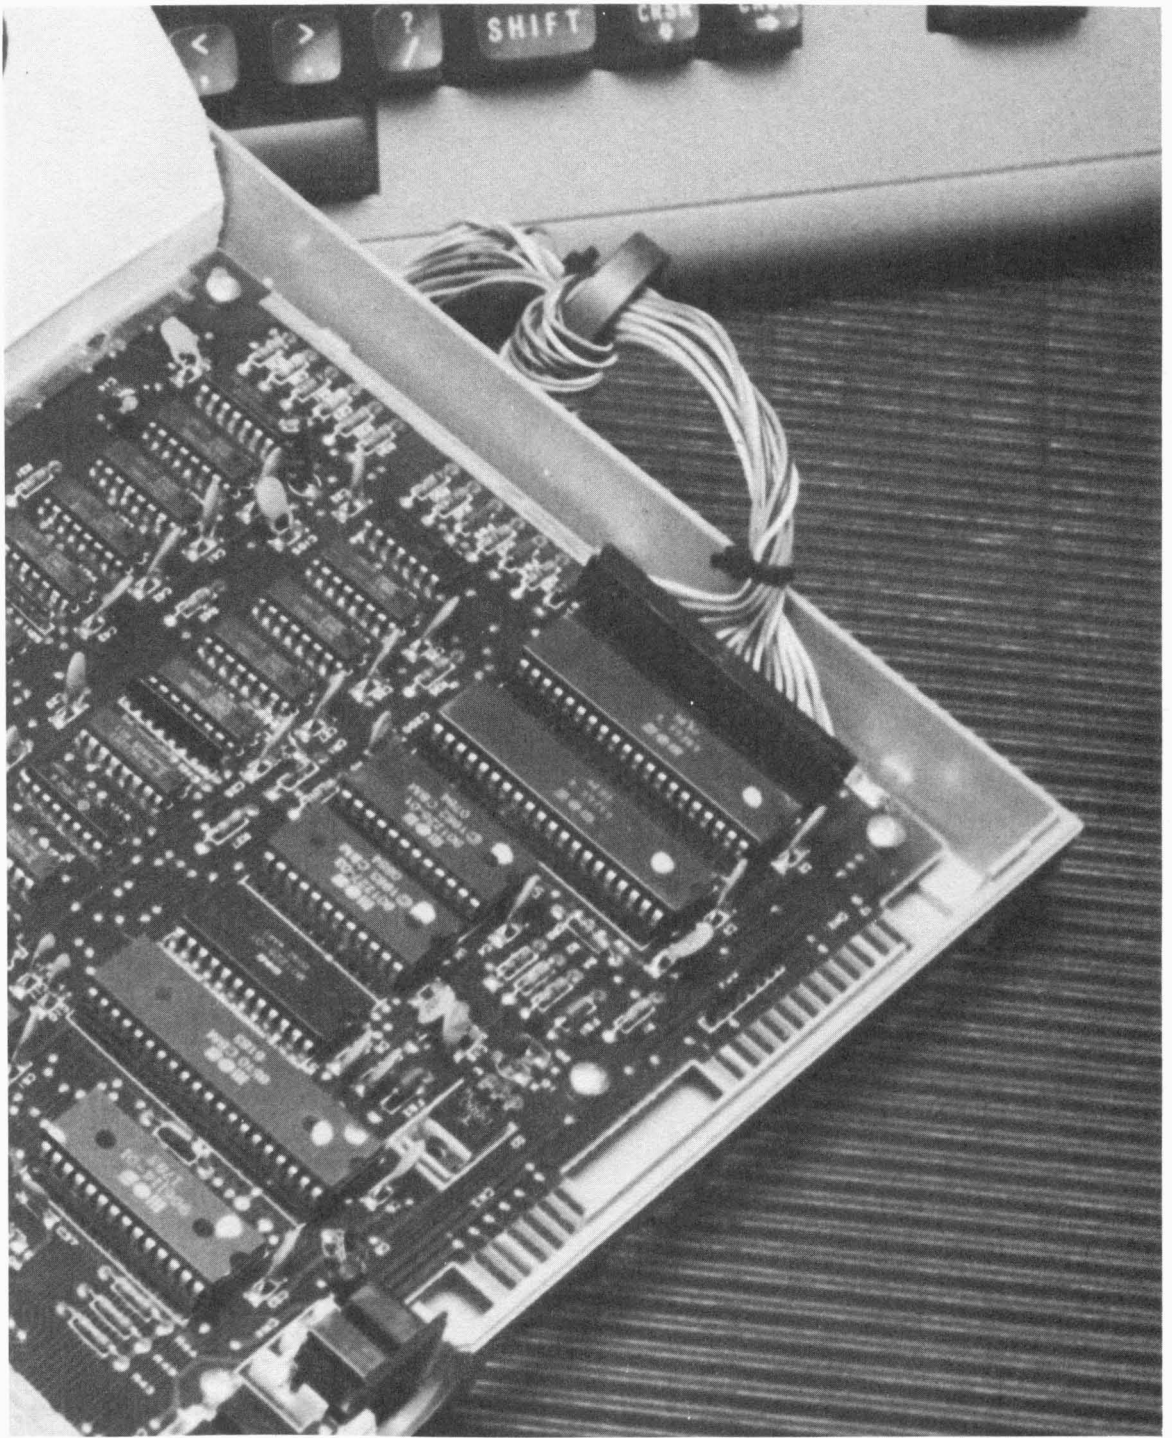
The keyboard is plugged into a socket at the end of the print board.
